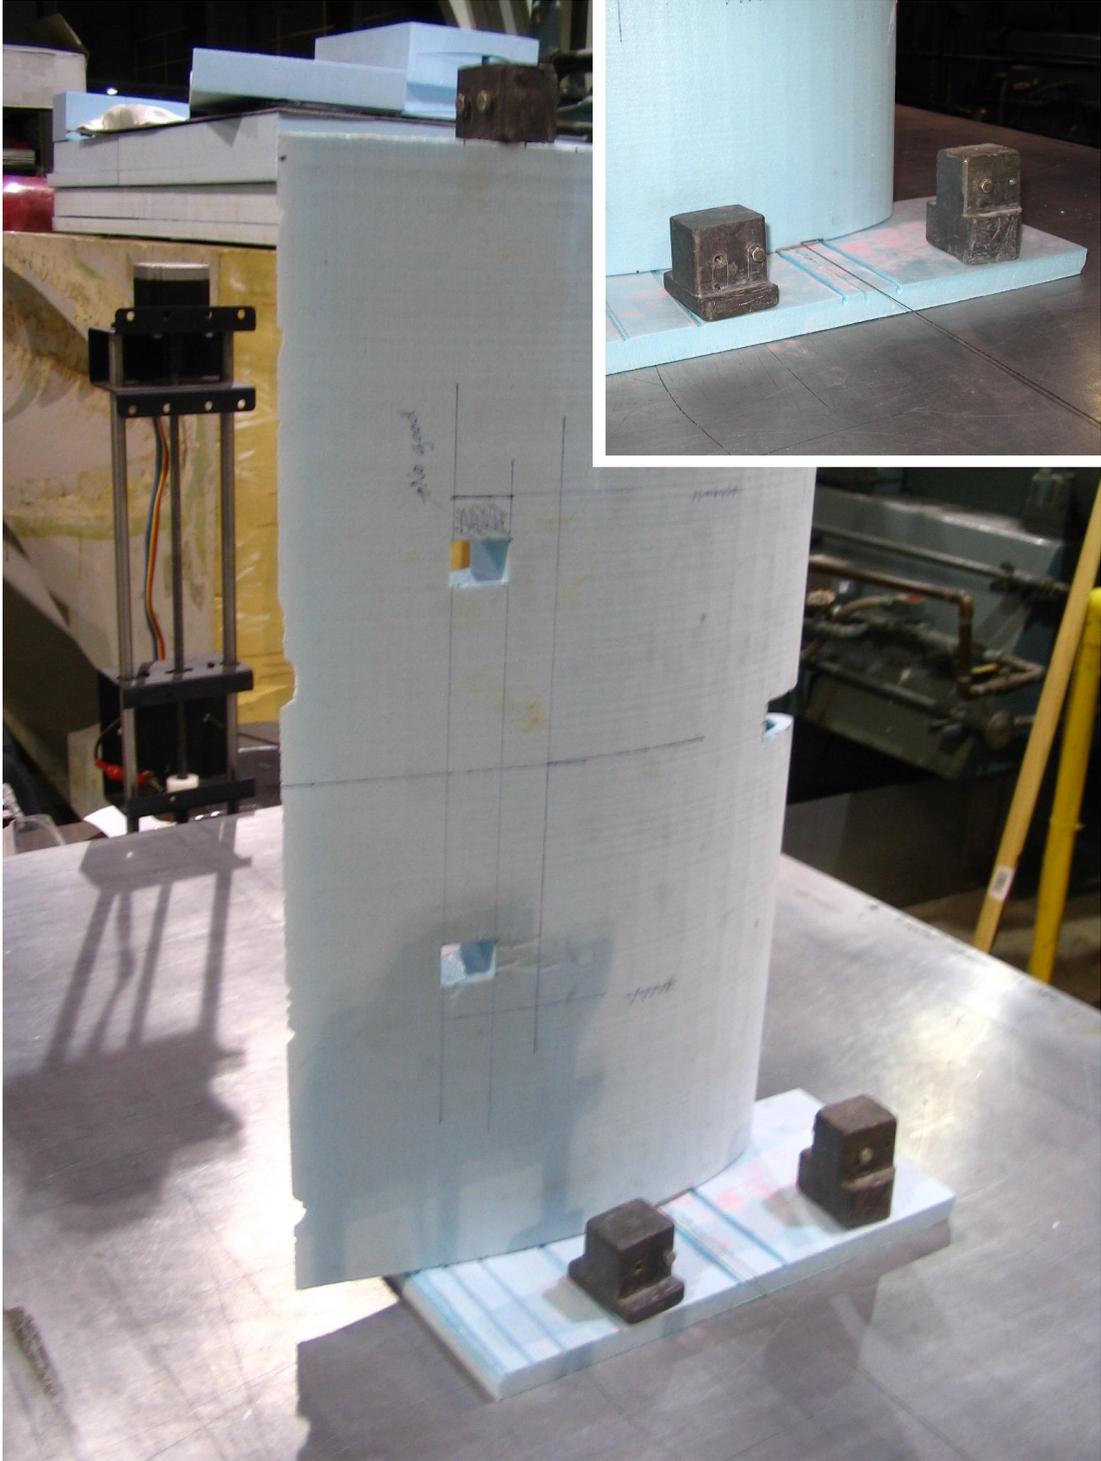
Center Wing-Section – notch being cut for spar end caps, detail view top right.
